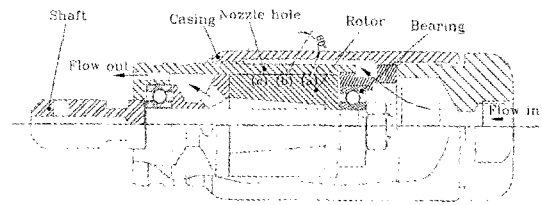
Structure drawing of air tool using a mixed type turbine rotor
